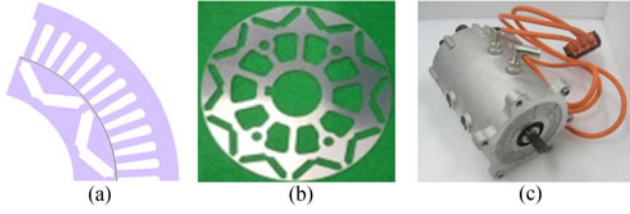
IPMSM motor with Nd sintered magnet. (a) Rotor core model. (b) Rotor core sheet. (c) IPMSM ASM.
